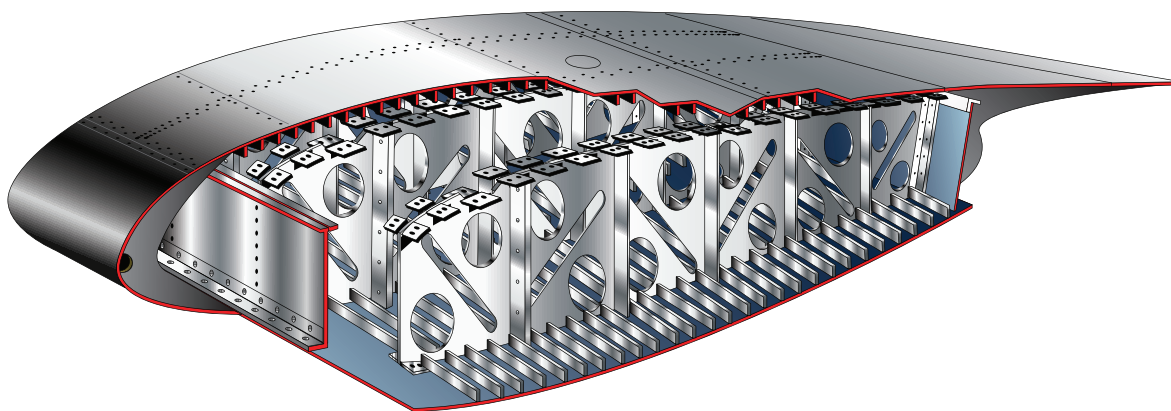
The skin is an integral load carrying part of a stressed skin design.
